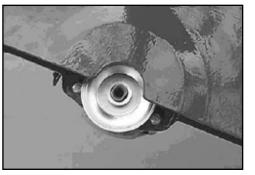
Clean and inspect the Inner Flange and Motor Shaft
